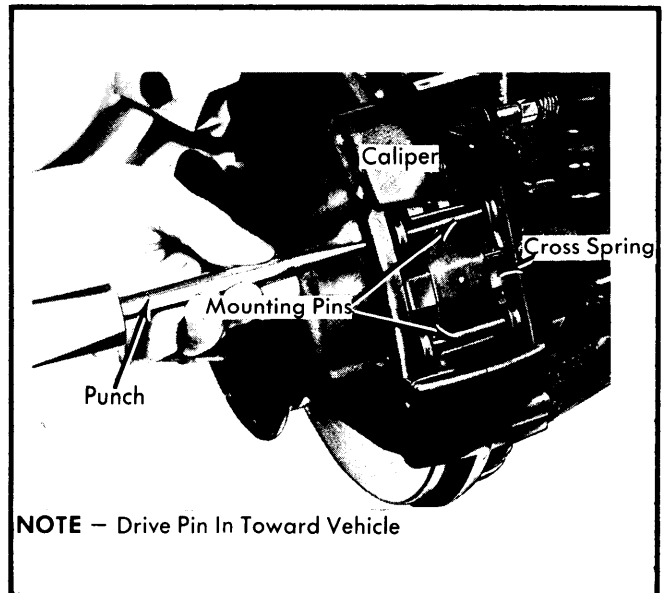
Knocking Out Disc Pad Mounting Pins On Teves Model Brakes
